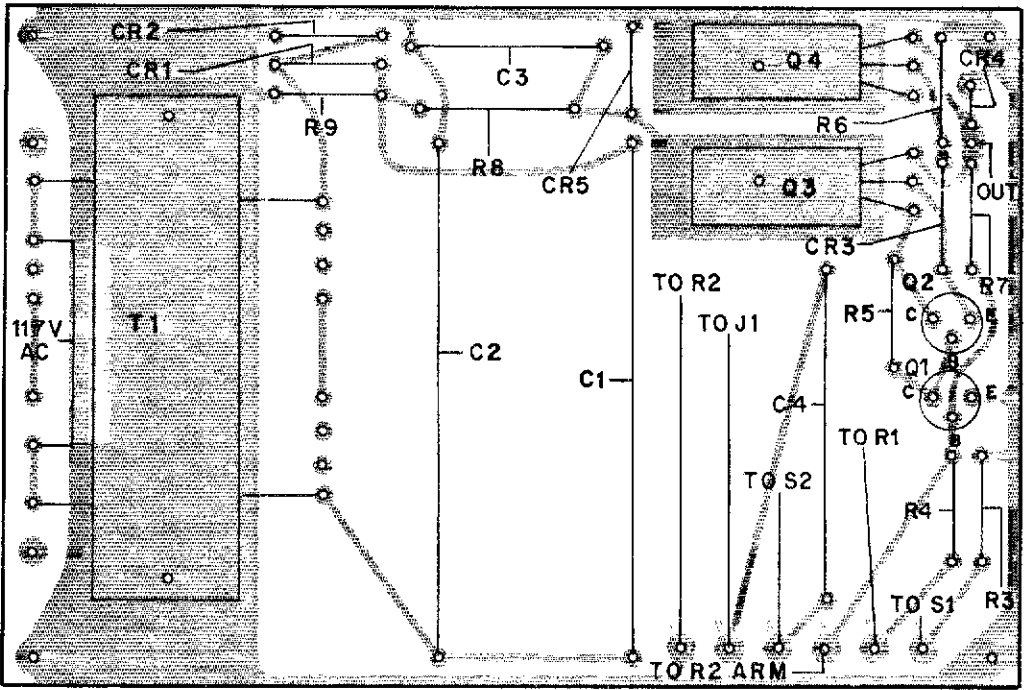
Printed-circuit-board layout for the video modulator, foil side. Components are on the far side, as shown. The board mounts inside a 5 × 7 × 2-inch box, on 3/16-inch metal spacers. Parts indicated are those of Fig. 7.
